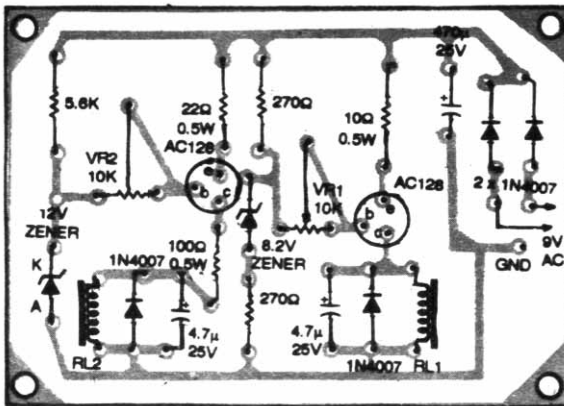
Components layout side of the PCB shown in Fig. 2.
